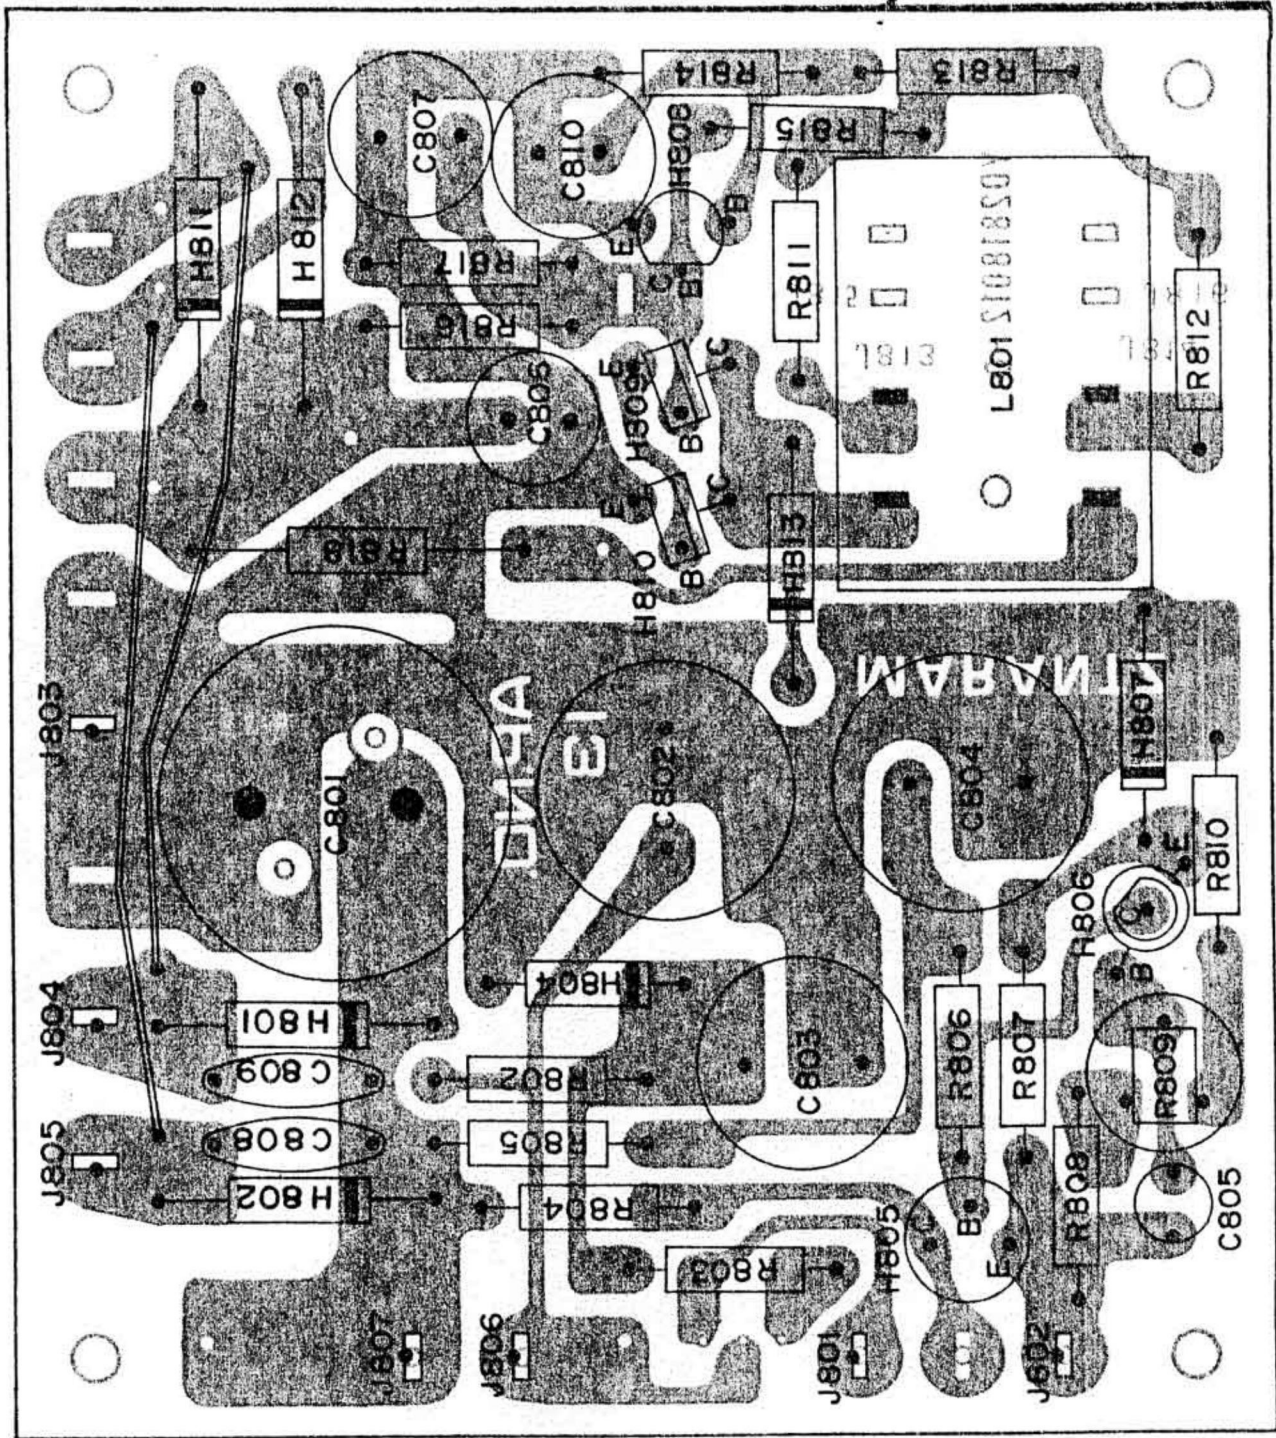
Regulated Power Supply and Protection Relay Circuit Assembly P800 Component Locators
